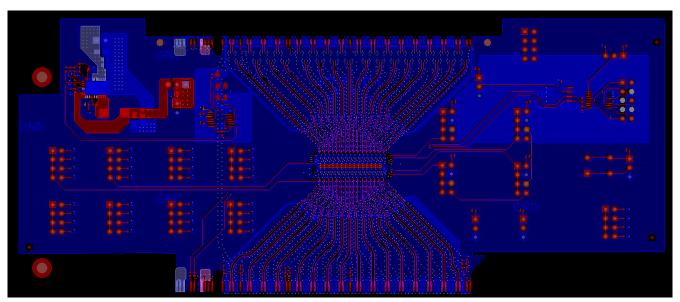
Top Layer View of TI PCIe Riser Card Using DS320PR1601 with CEM Connectors
